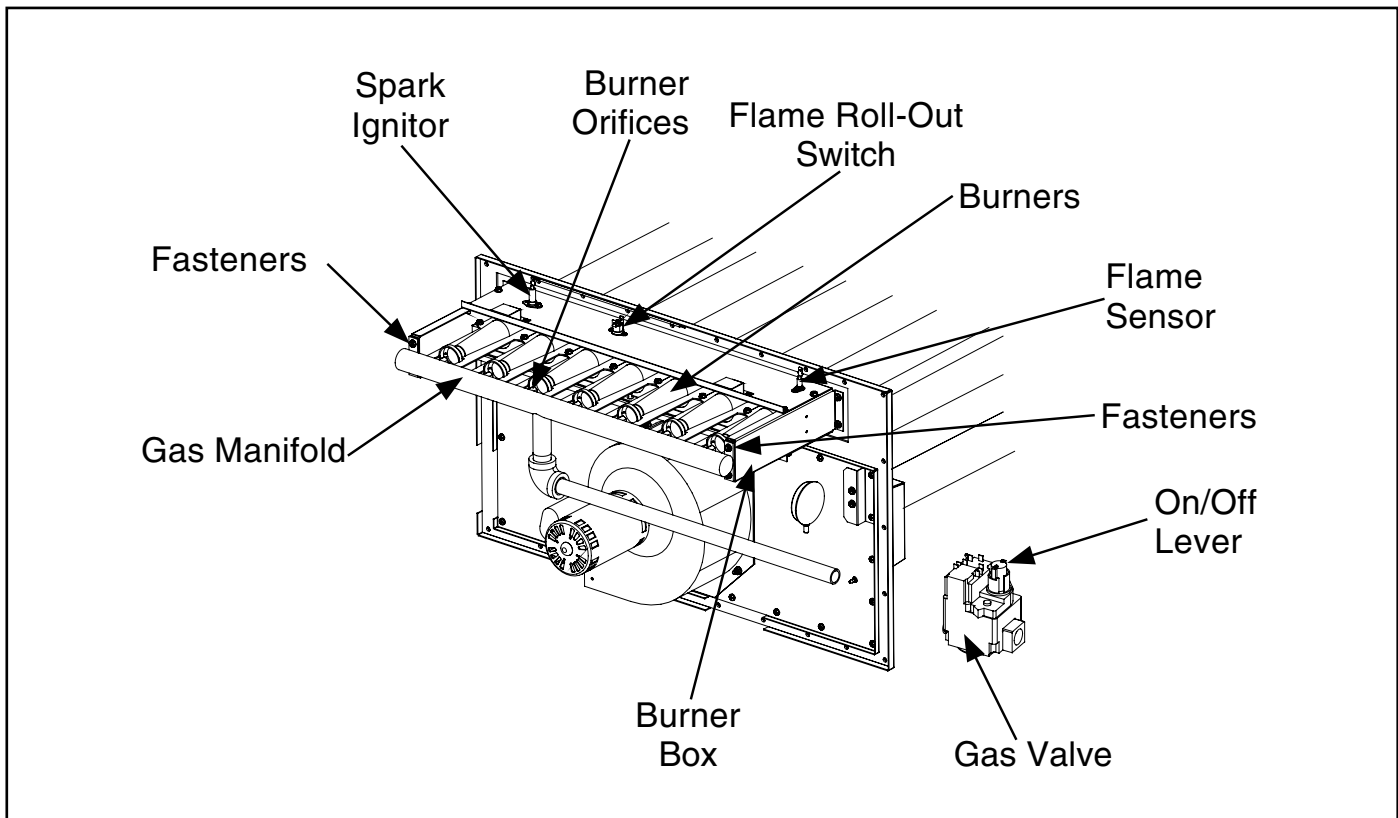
Typical Installation For R4GM-150/180 Burner Box
